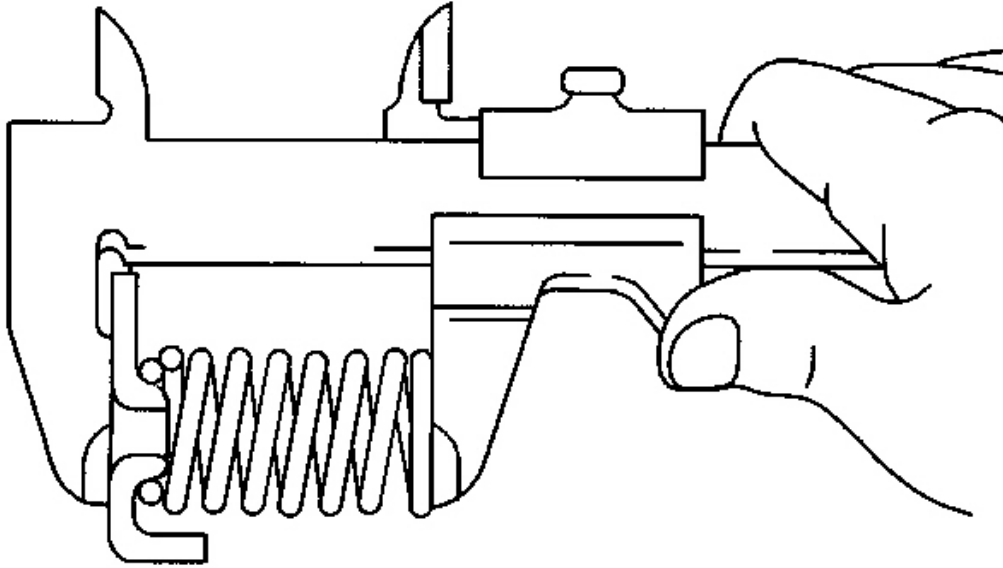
Measuring Free Length Of O/D Brake Piston Return Spring Using The Vernier Calipers
